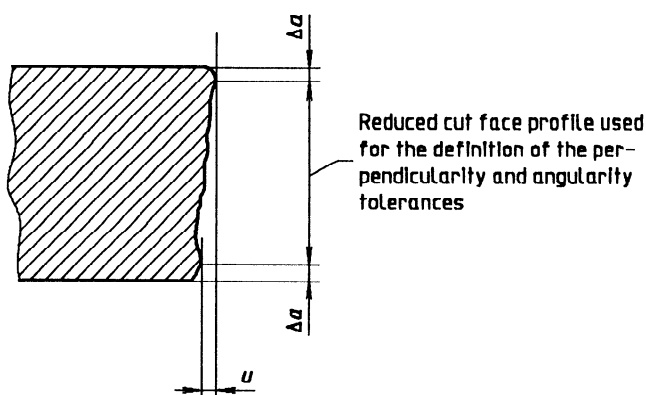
Definition of measuring area for perpendicularity and angularity tolerances
